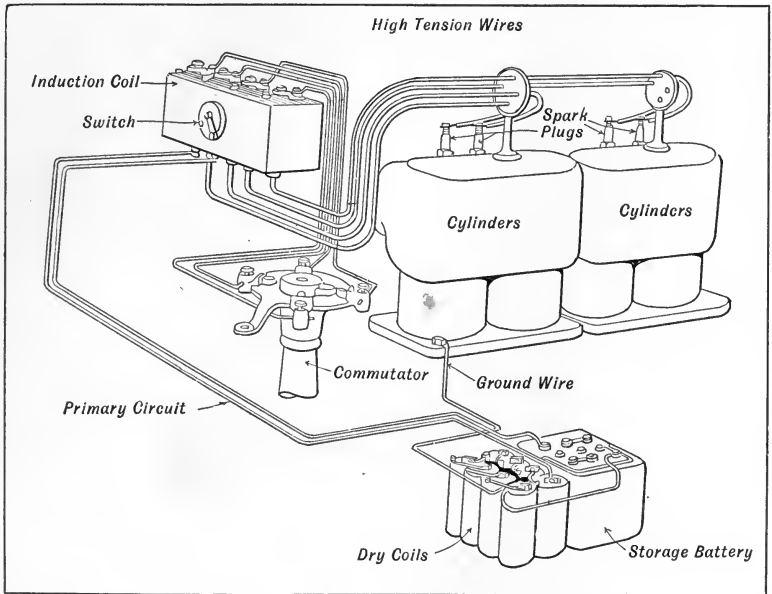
Assembly View of Four-Cylinder Ignition Group Showing All Devices and Methods of Wiring.
